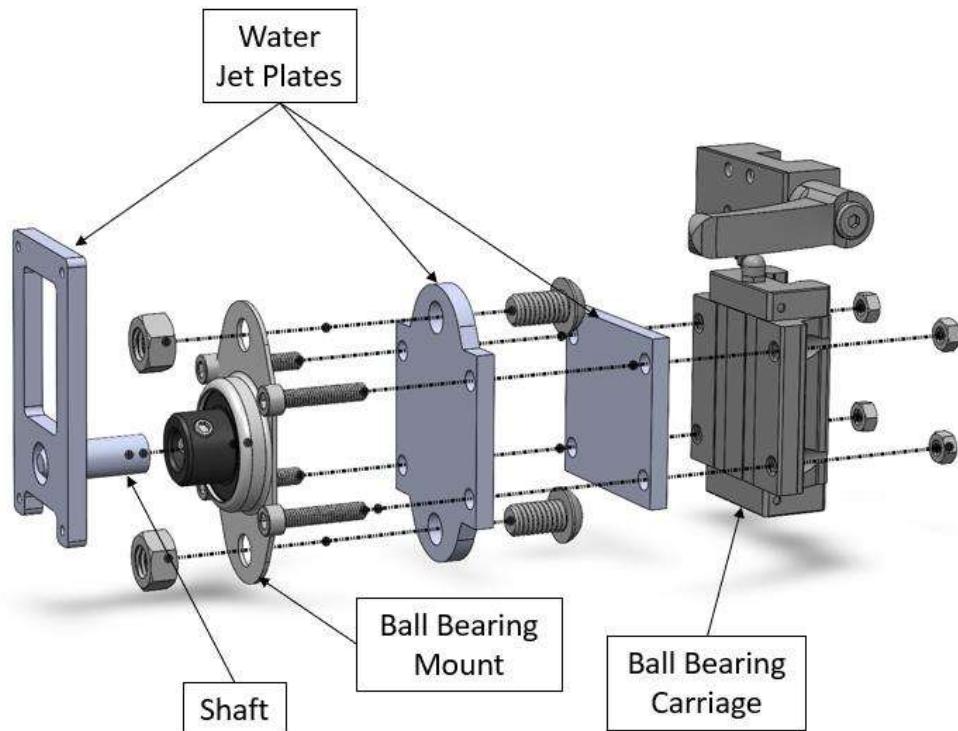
Test stand mount design that connects from vertical test stand struts to quadruped body frame.
